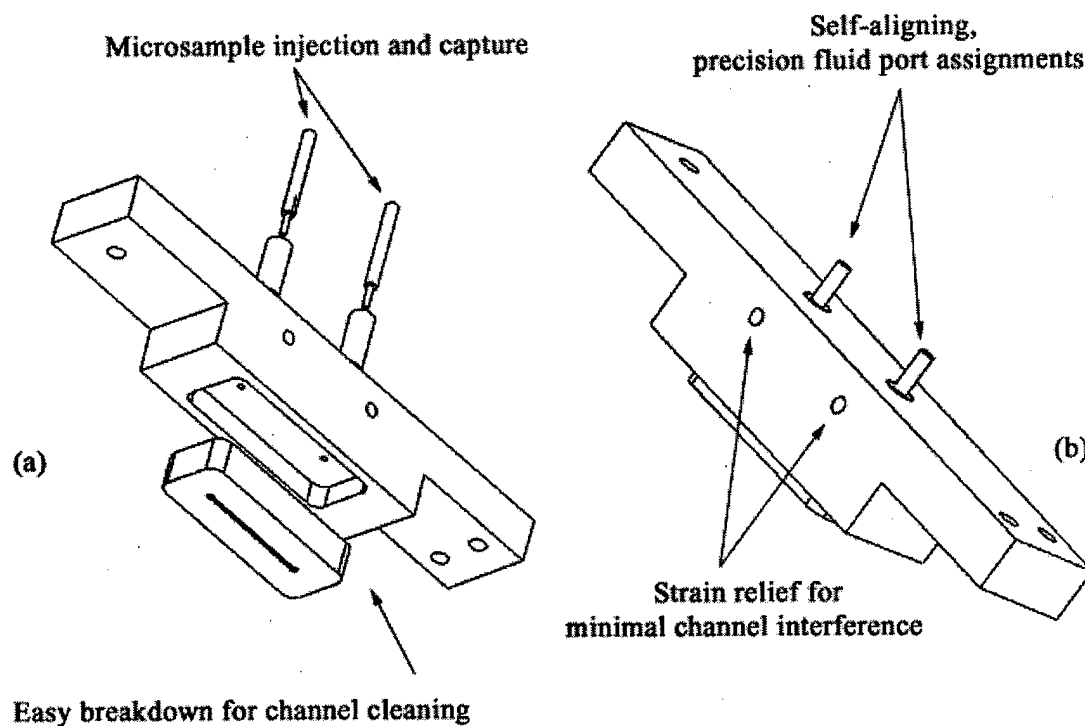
Microfluidic assembly highlighting the unique design features: (a) Exploded isometric view (b) Collapsed isometric view.
